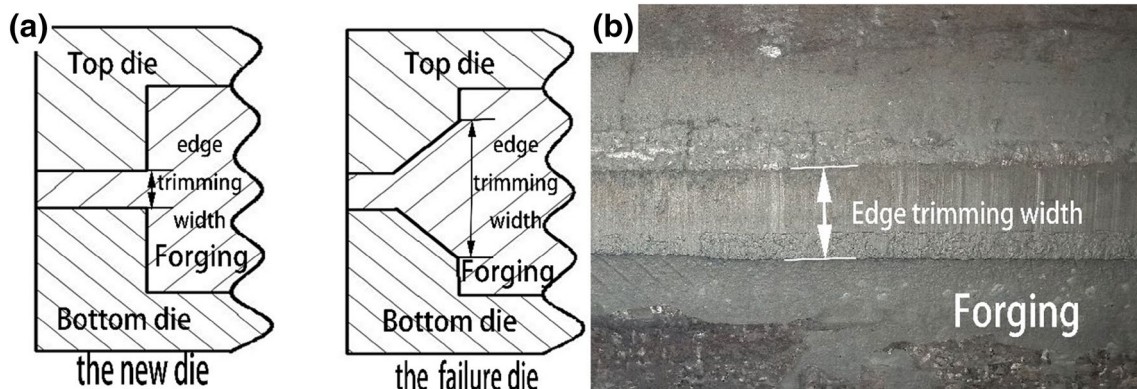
a The mechanism of edging of forgings during die processing and b shape of cutting edge of forging
